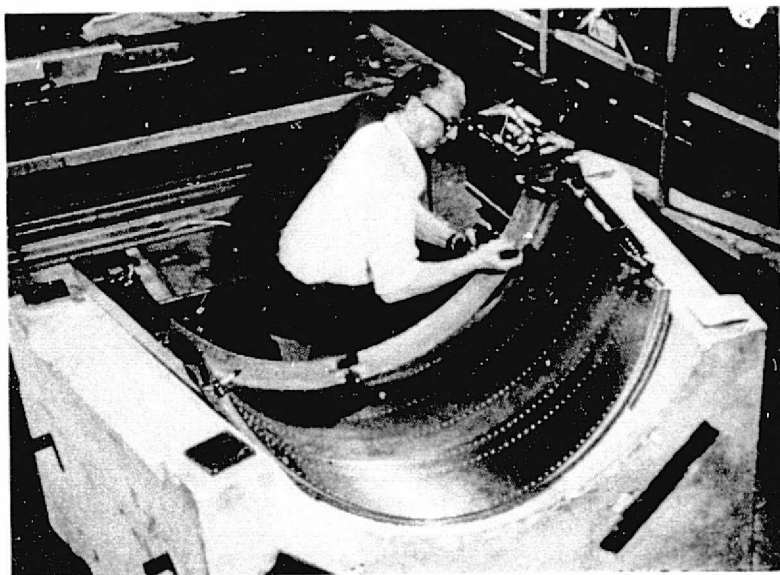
THRUST REVERSER DOOR IN TOOL
